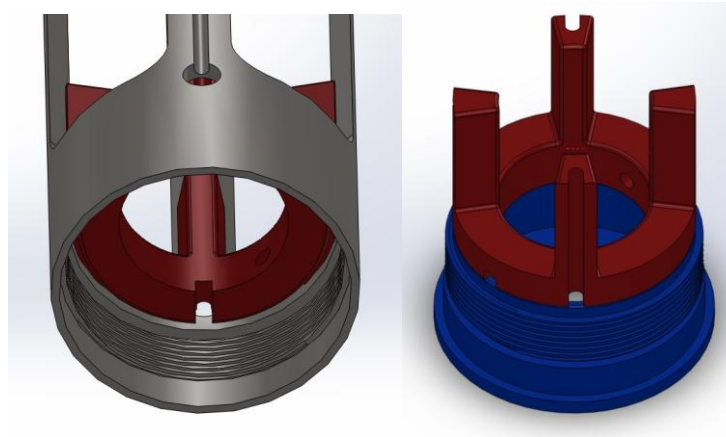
3D model of new Laser Mount, red, inside modified Economole Chassis (left), and modified Lower Mount, blue (right)
